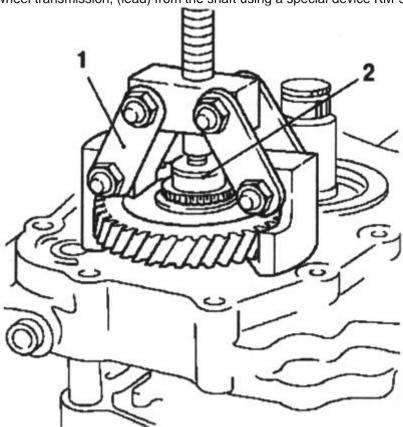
Withdrawal dentate wheels with in power special devices:
